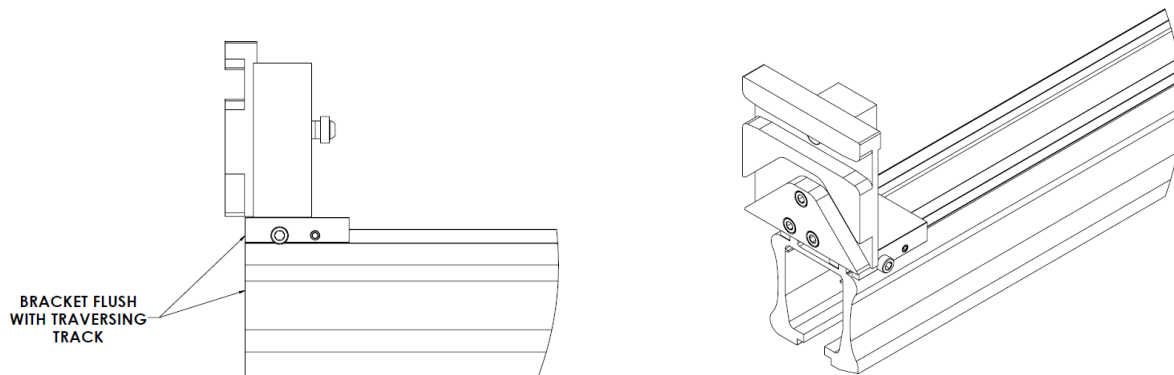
Traversing Track TGB Mounted to the Traversing Track.
